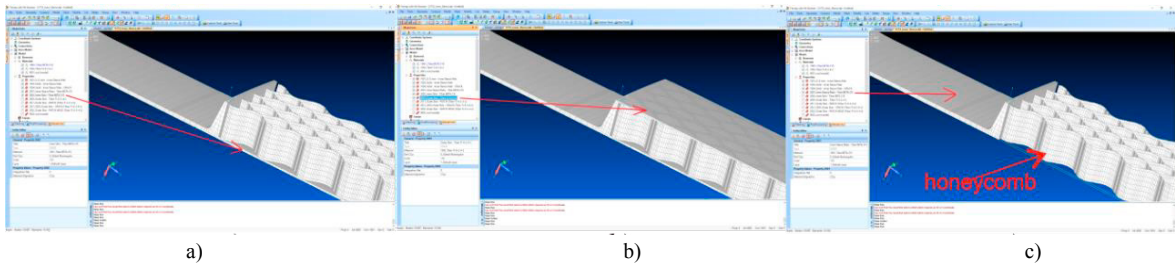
Inner sleeve subpart: (a) Inner skin; (b) Outer skin; (c) Inner sleeve plate.
